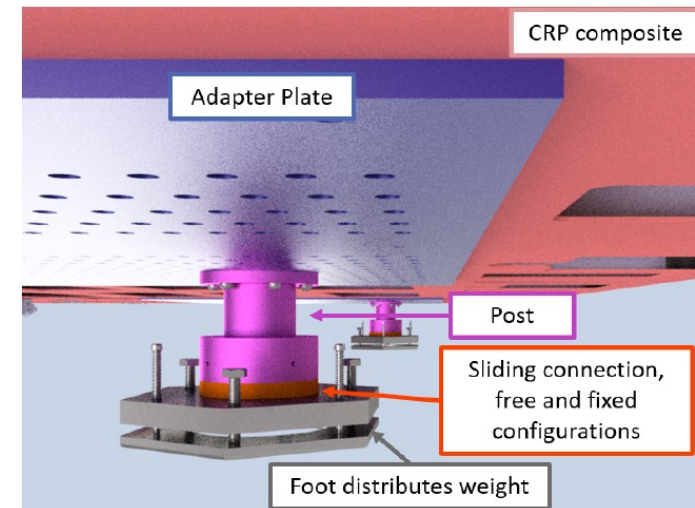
The bottom support design consists of four components: the adapter plate out of G10/FR-4, and aluminum post, a low-friction plastic sliding connection, and a type 316 stainless steel foot.
